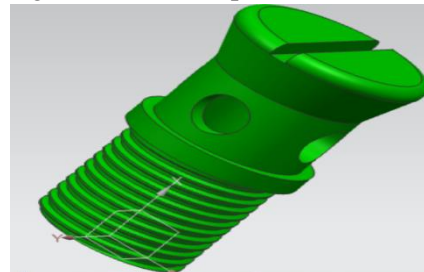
Isometric Screw End Cap With Slot Hole To Regulate The Exit Hot Air.
